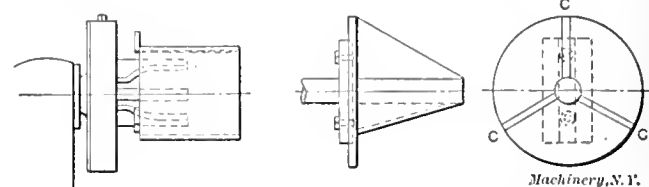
Long-jawed Universal Chuck used for Facing Ends of Ring Blank. Fig. 2. Winged Center held in the Turret end used to set the Blank on the Face-plate.
